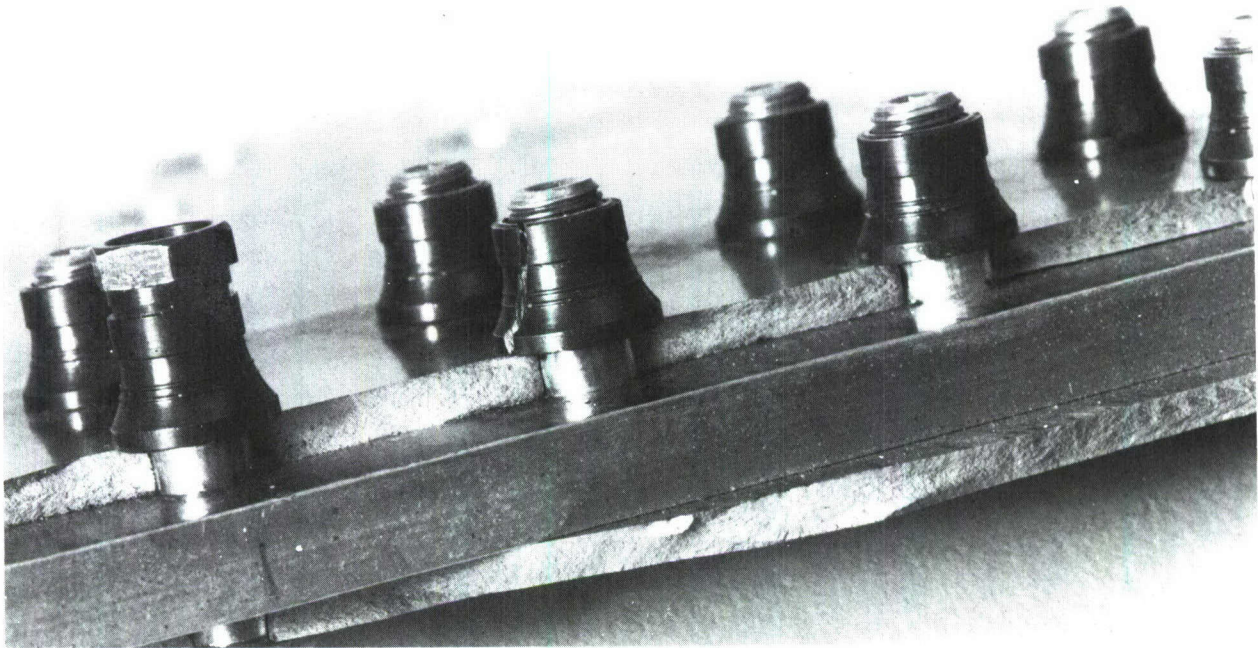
Specimen 4.6A-5: Cracked Collar and Fretting-Induced Surface Flaw
